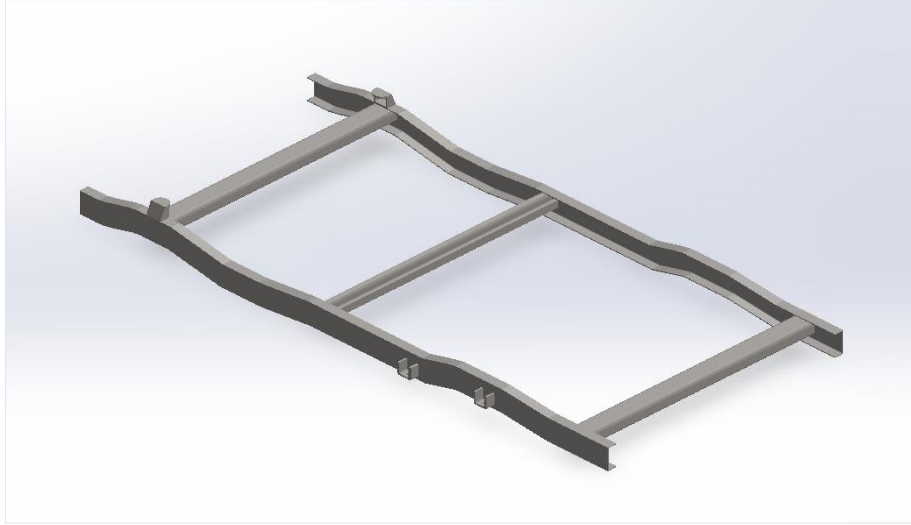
3D CAD model of C-Section Cross Section Chassis
